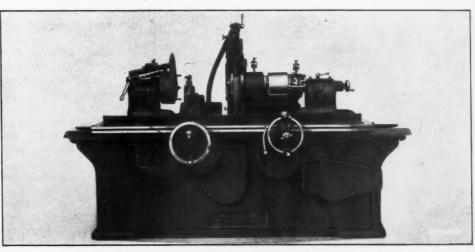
Grinding Machine for Automobile Regrinding Work, made by the Norton Co.
